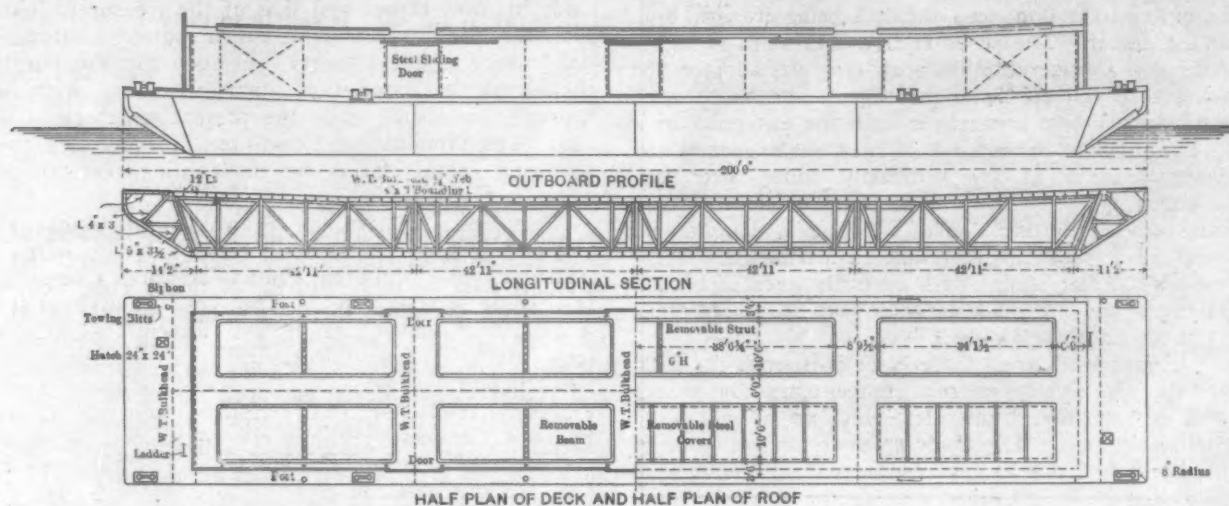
Outboard Profile, Longitudinal Section and Plan of New Steel Barges for the Mississippi River.
